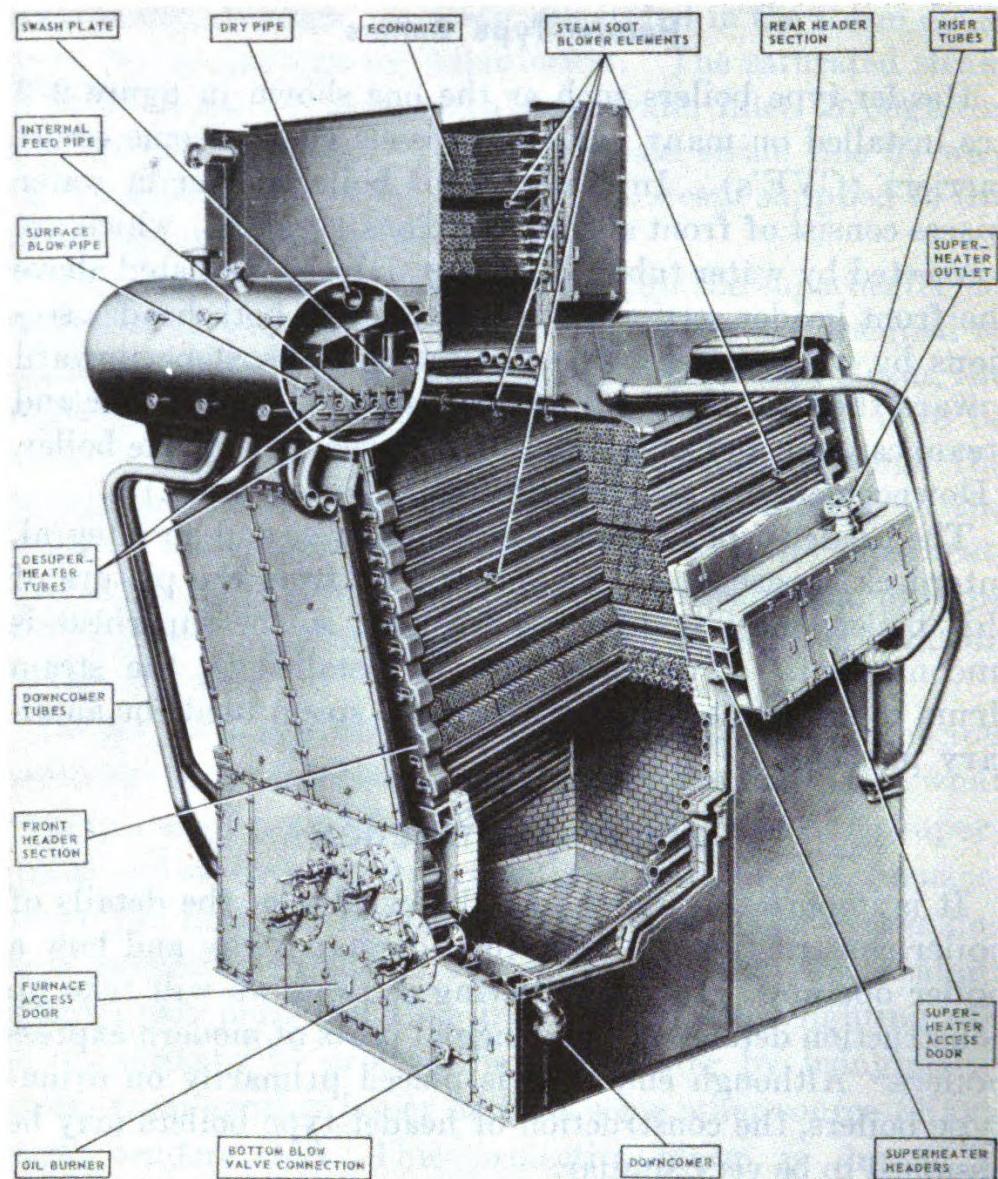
Small-tube, straight-tube, single-pass, sectional header boiler.
